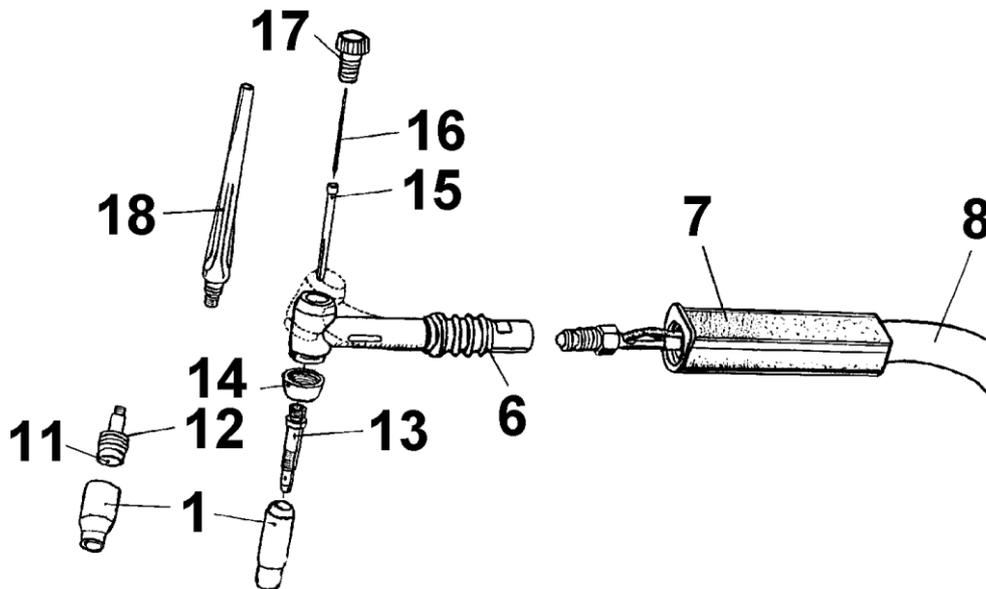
Construction of the TIG welding torch (IEC-60974-7. 2019. p25.).
